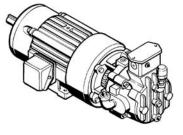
MagnaShear "Quick Mount" Motor Brake
